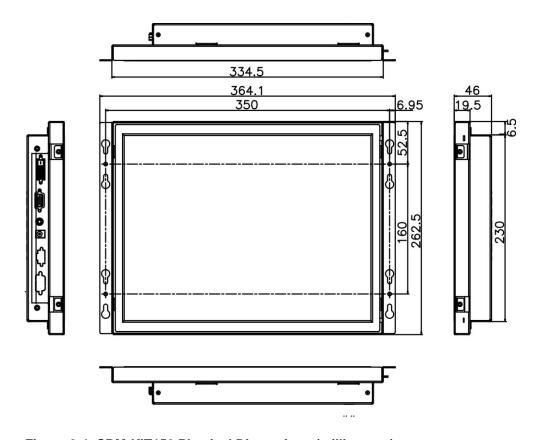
SRM-KIT150 Physical Dimensions (millimeters)
